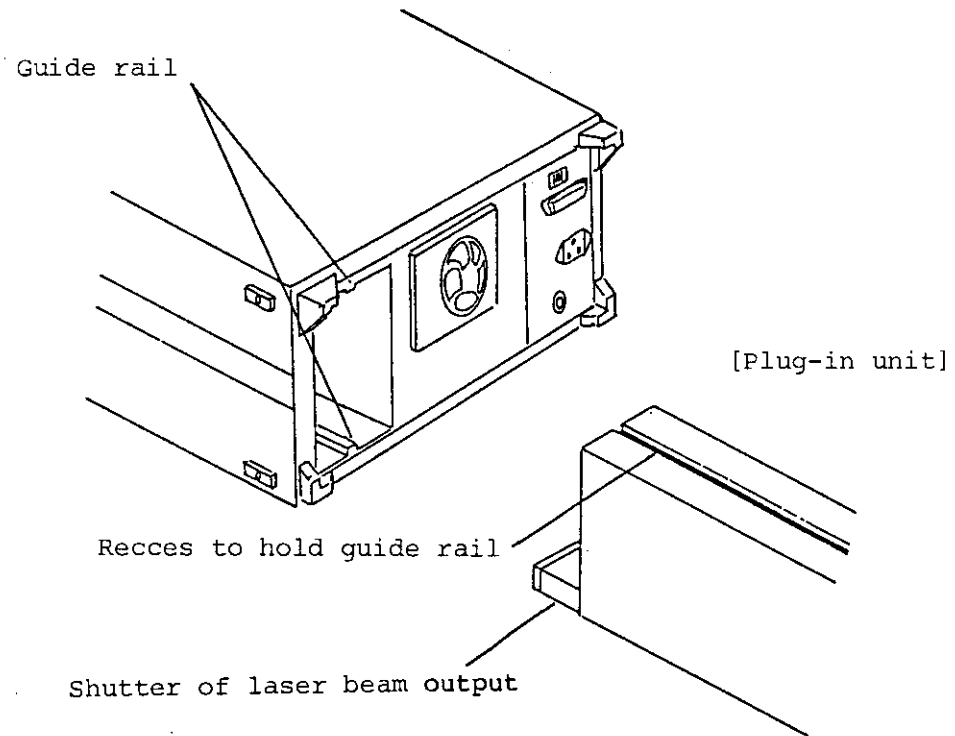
5 Mounting and Demounting of Plug-in Unit
